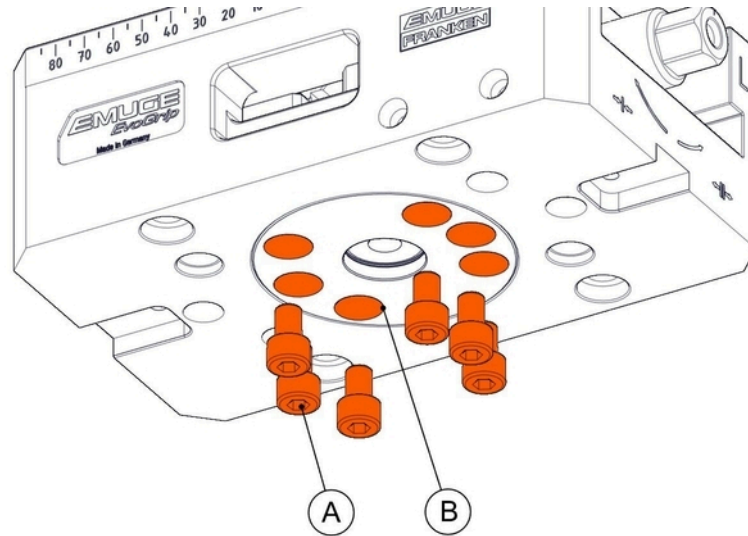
Schematic illustration: Pre-fastening the screw shaft
